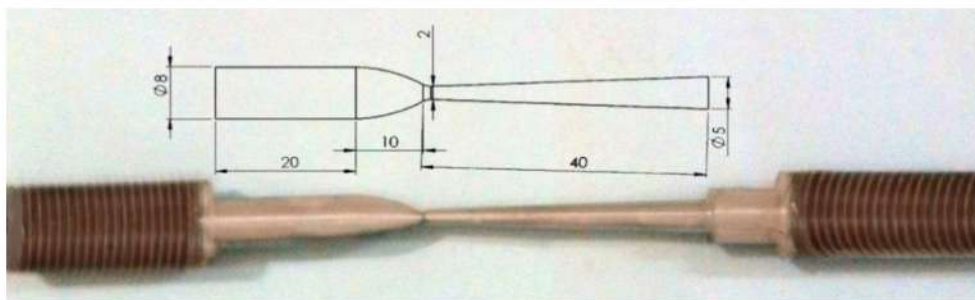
Photograph of Tools For Electro-Discharge Machining of De-Laval Nozzle
